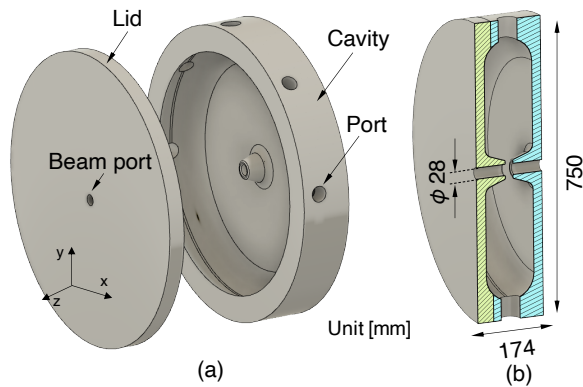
Design model of the single gap buncher with CST MWS. (a) Exploded view. (b) Sectional view.
